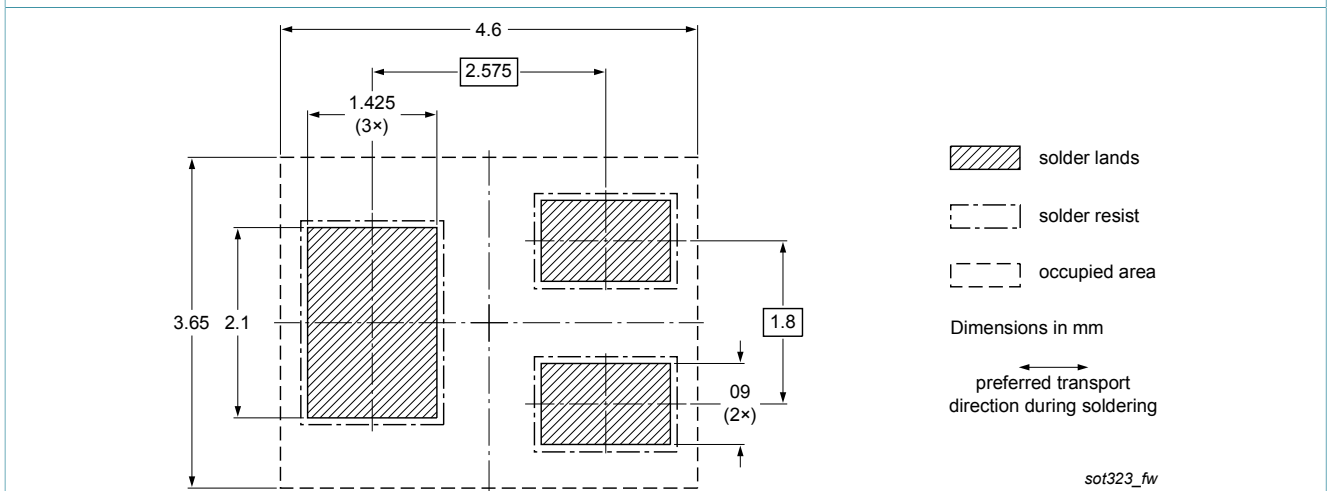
Wave soldering footprint for SC-70 (SOT323)
